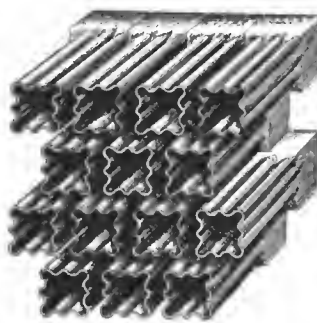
Sectional view of tubes cut in center, showing water circulation space.
